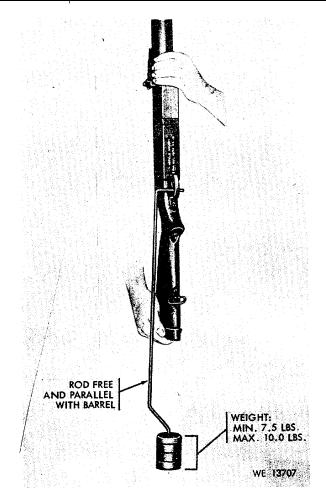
Measuring trigger pull with trigger pull measuring fixture ((4933-647-3696).
